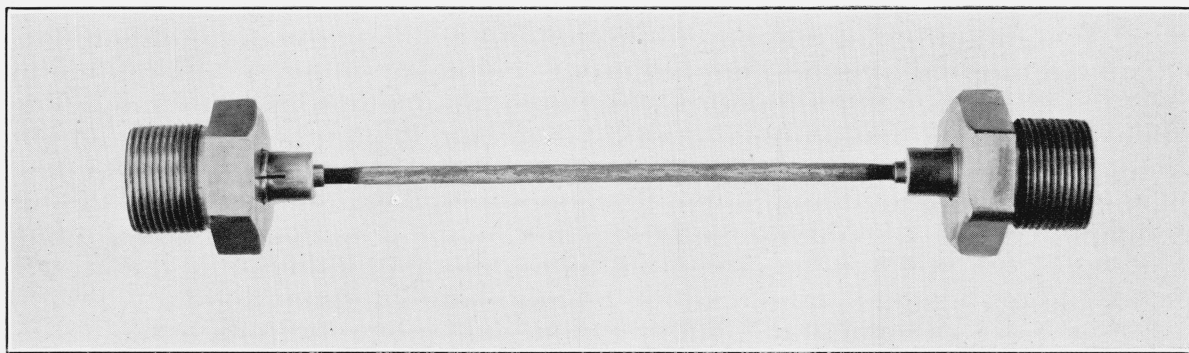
A galvanized-wire fatigue-test specimen with gripping device attached, as used in Haigh machine, $\frac{1}{2}$ size.
